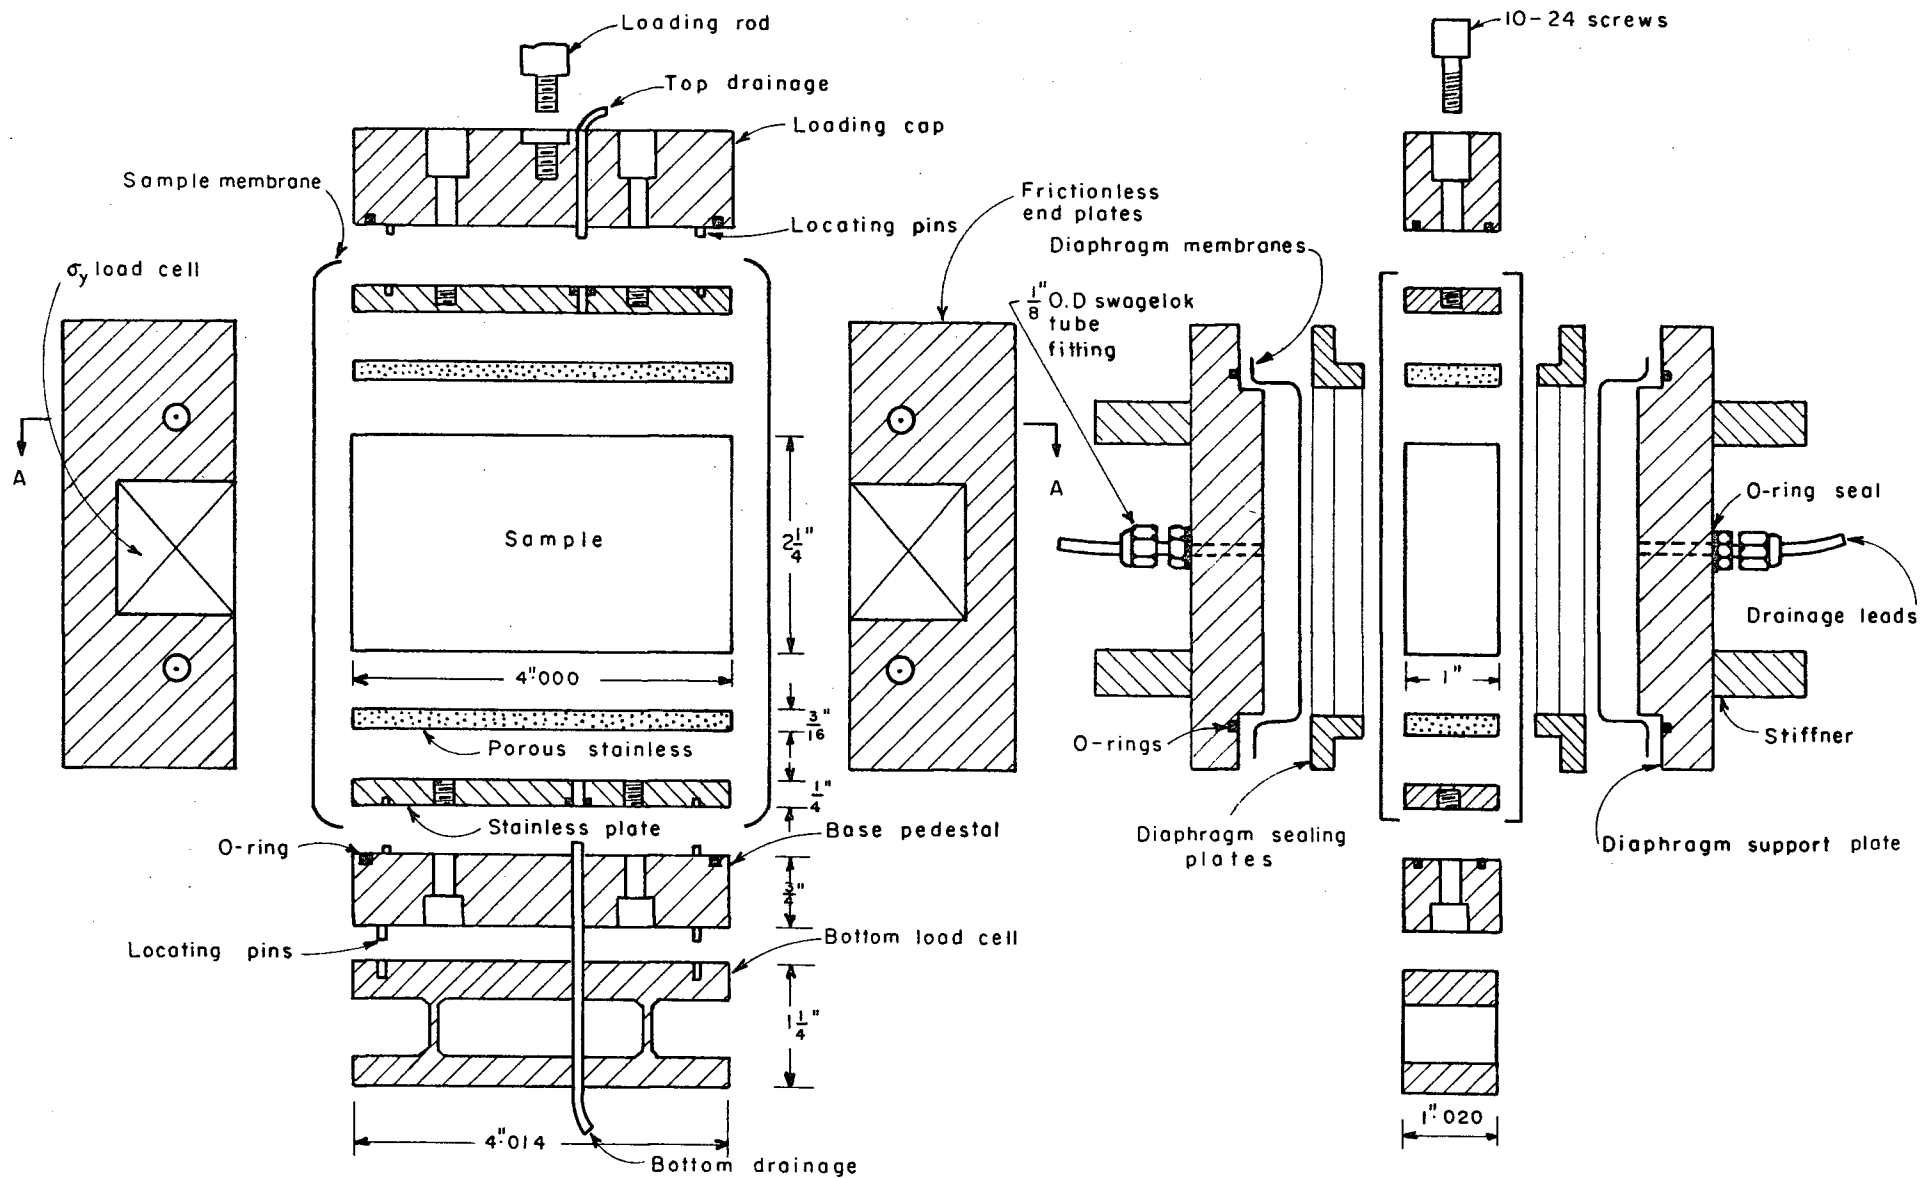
EXPLODED VIEW OF THE PLANE STRAIN APPARATUS.
